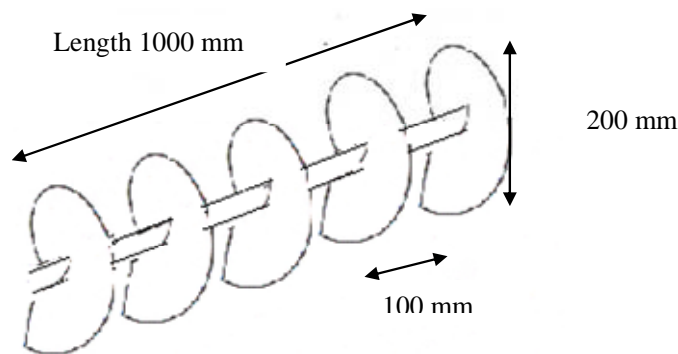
Details of spiral auger used for manure spreading. Spiral auger- disc size: Thickness = 2 mm; Pipe outside dia = 48 mm.
